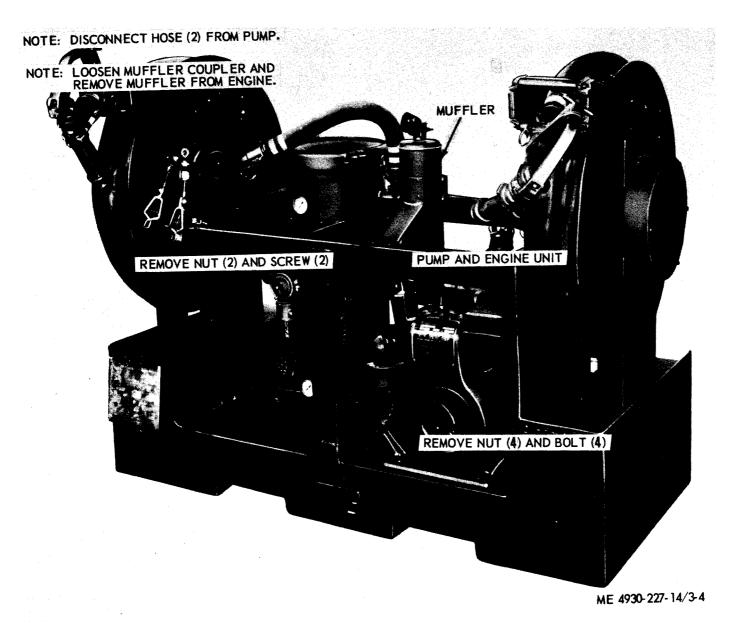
Pump and engine unit and muffler, removal and installation.
